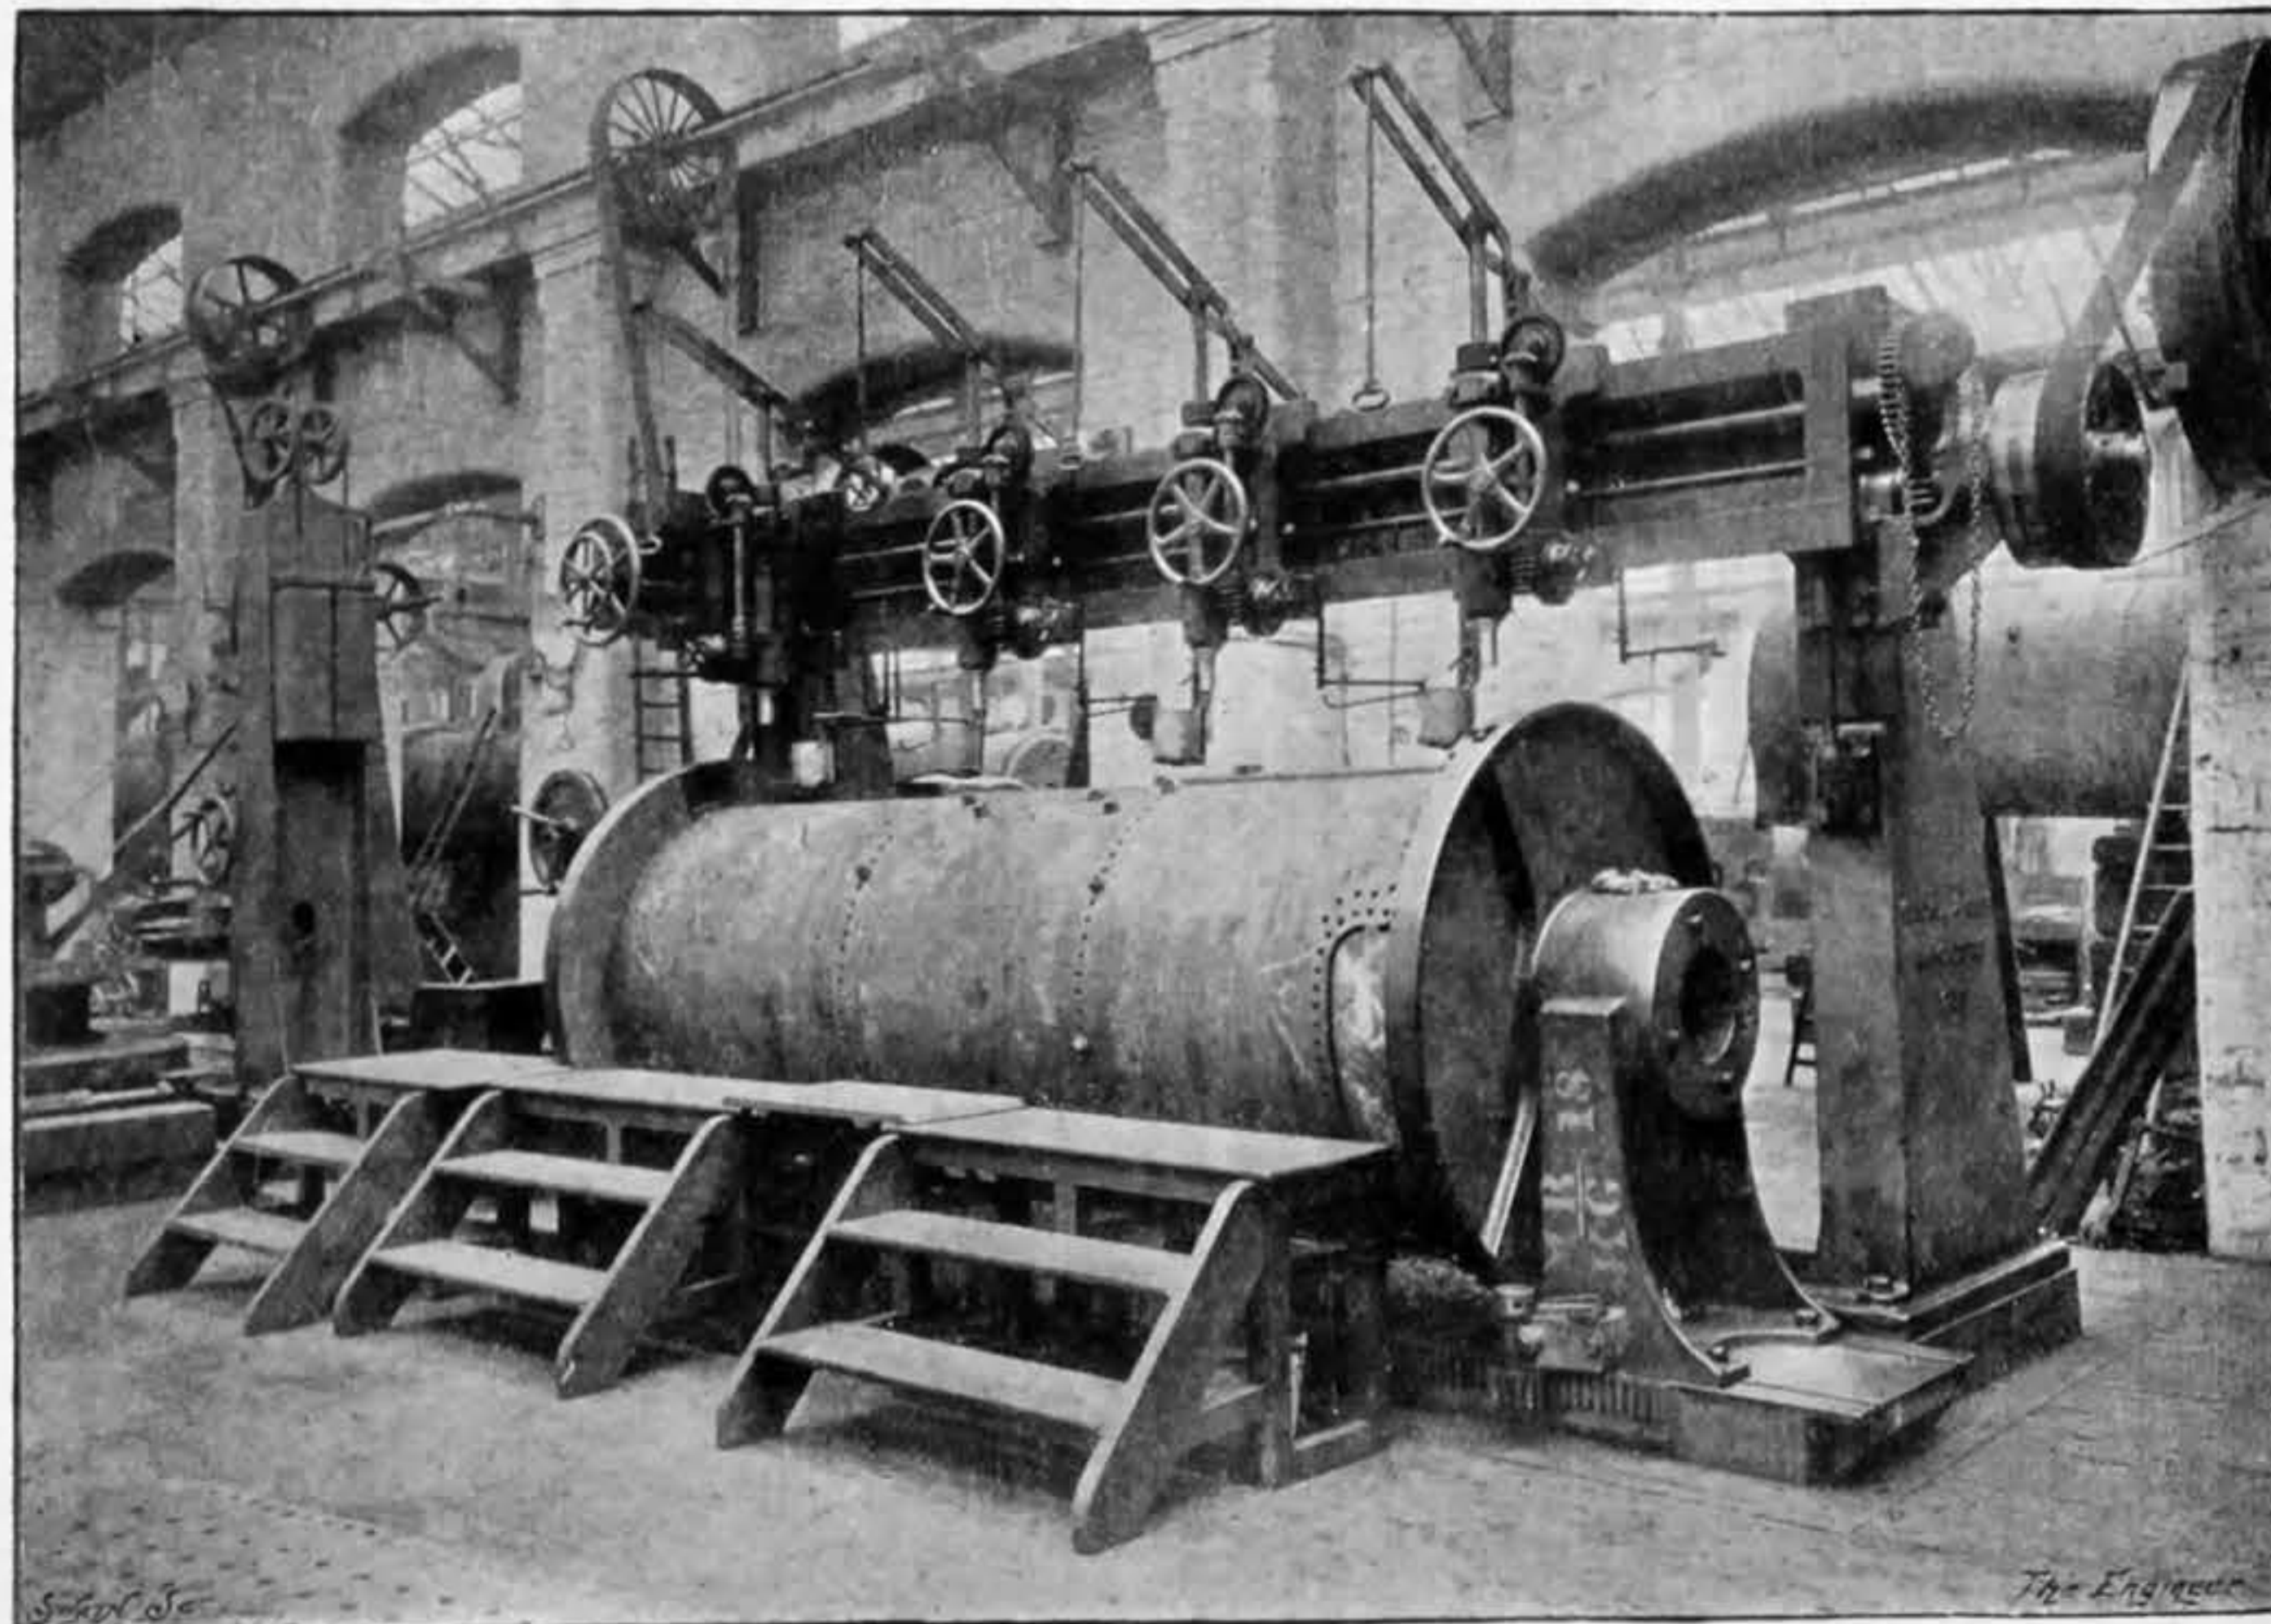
BOILER SHELL PLATE DRILLING MACHINE
